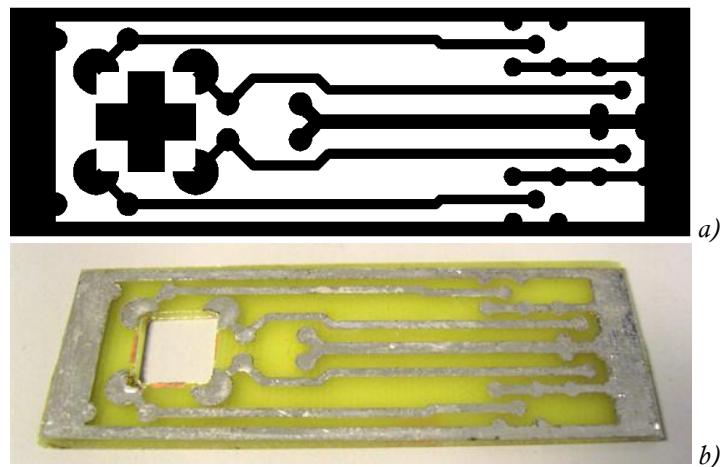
a) Design of the mask used to make the PCB for this work; b) picture of a PCB used in this work, the copper tracks are coated with solder to protect the copper and ease the soldering of the other components.
